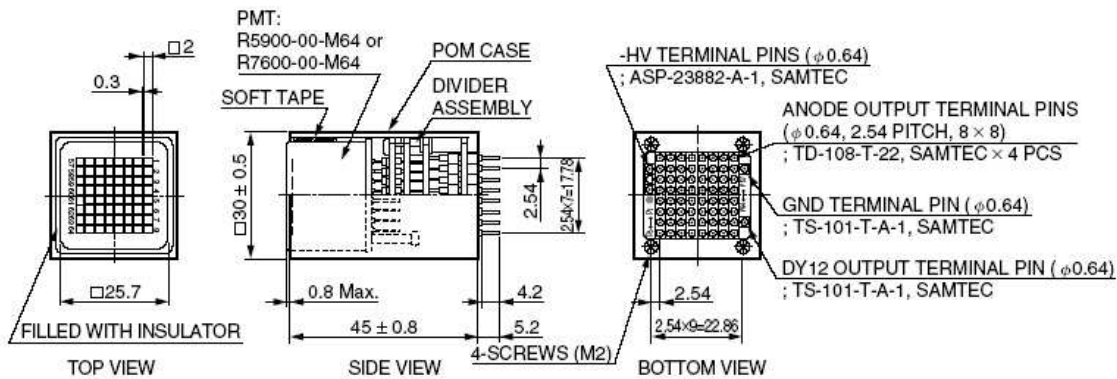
Technical drawing of the Hamamatsu H7546 PMT.
